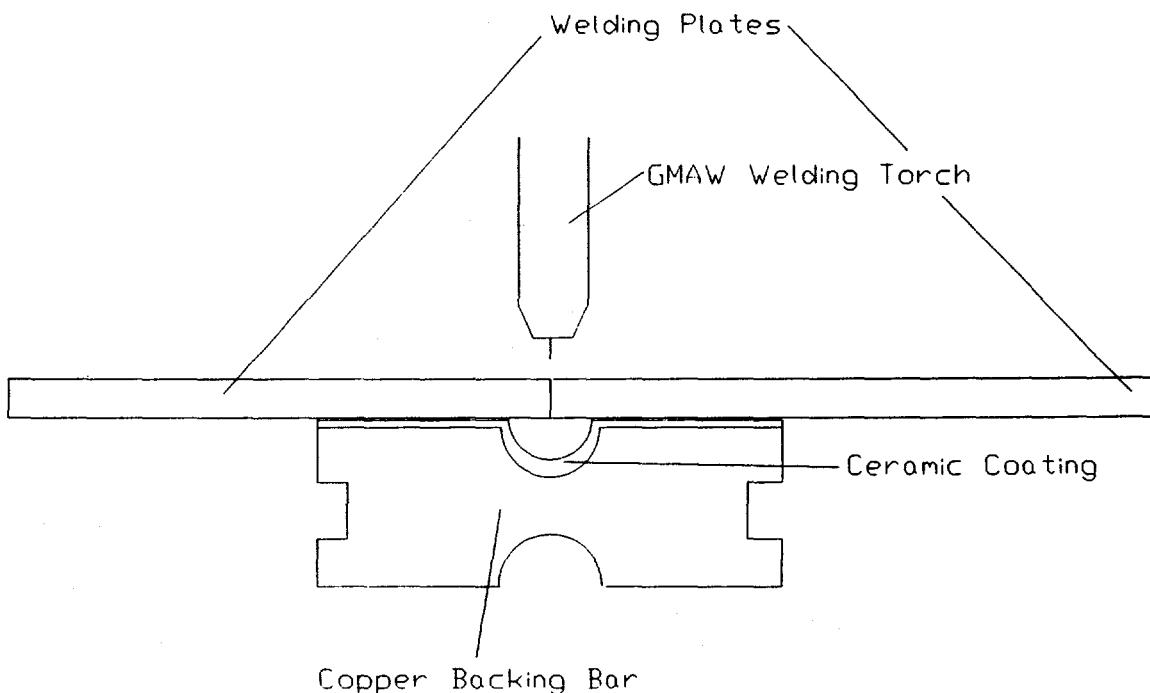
In shipbuilding and many other industries, copper weld backing bars are used to draw heat out of welds.
